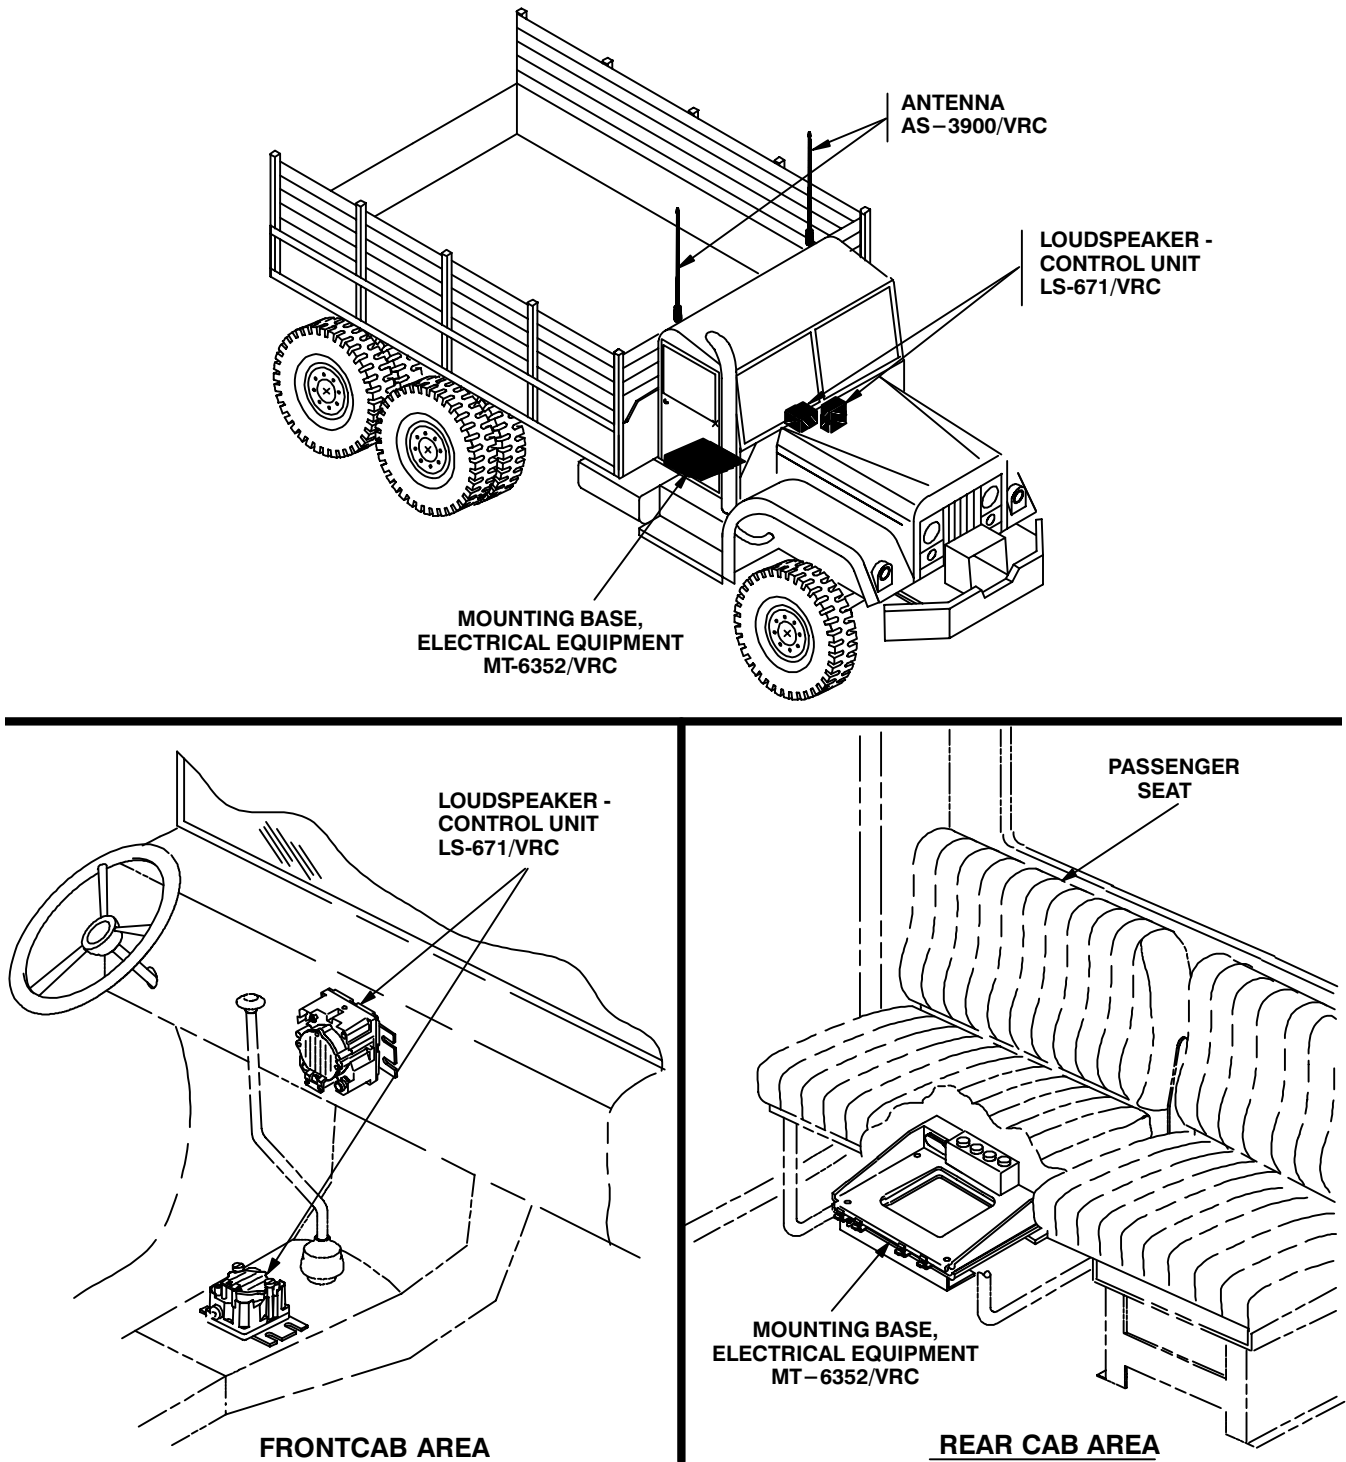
(1). MK and Radio Installation: MK Equipment Locations
